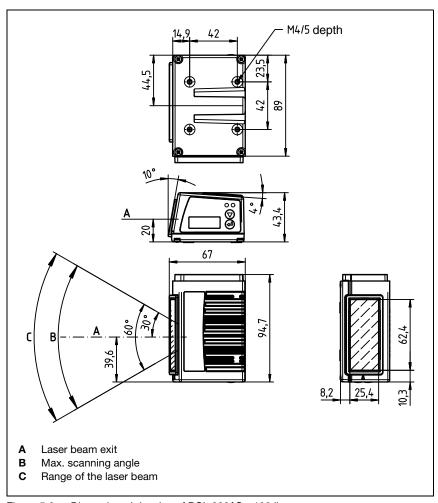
Dimensioned drawing of BCL 338 i S...102 line scanner
